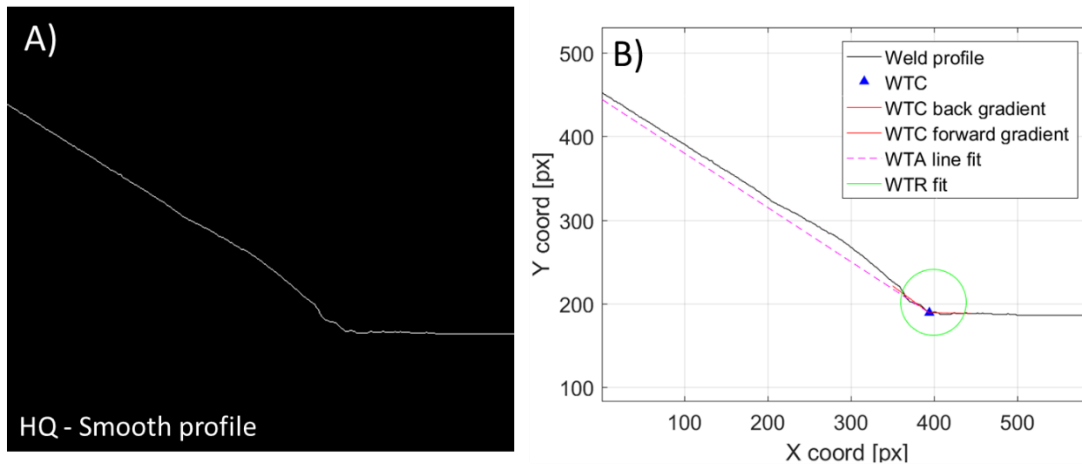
HQ smooth weld toe profile - A) Original single-pixel weld profile obtained from ImageJ processing; B) Weld toe geometry extraction after MATLAB processing.
